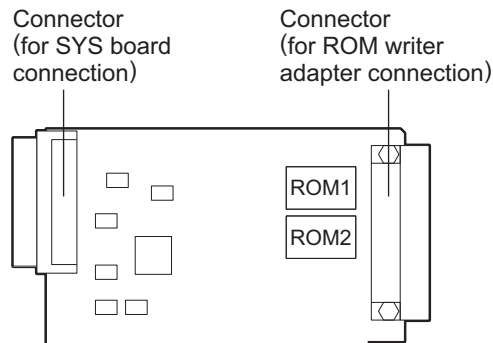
Jig board: PWA-DWNLD-350-JIG1 (16 MB)
